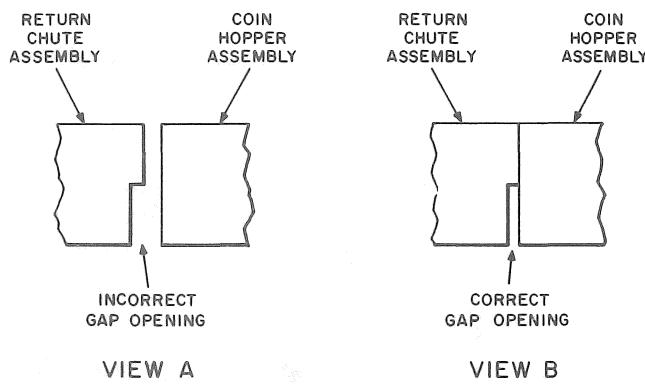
Relative Position of Return Chute Assembly and Coin Hopper Assembly As Viewed Down Hopper Throat
